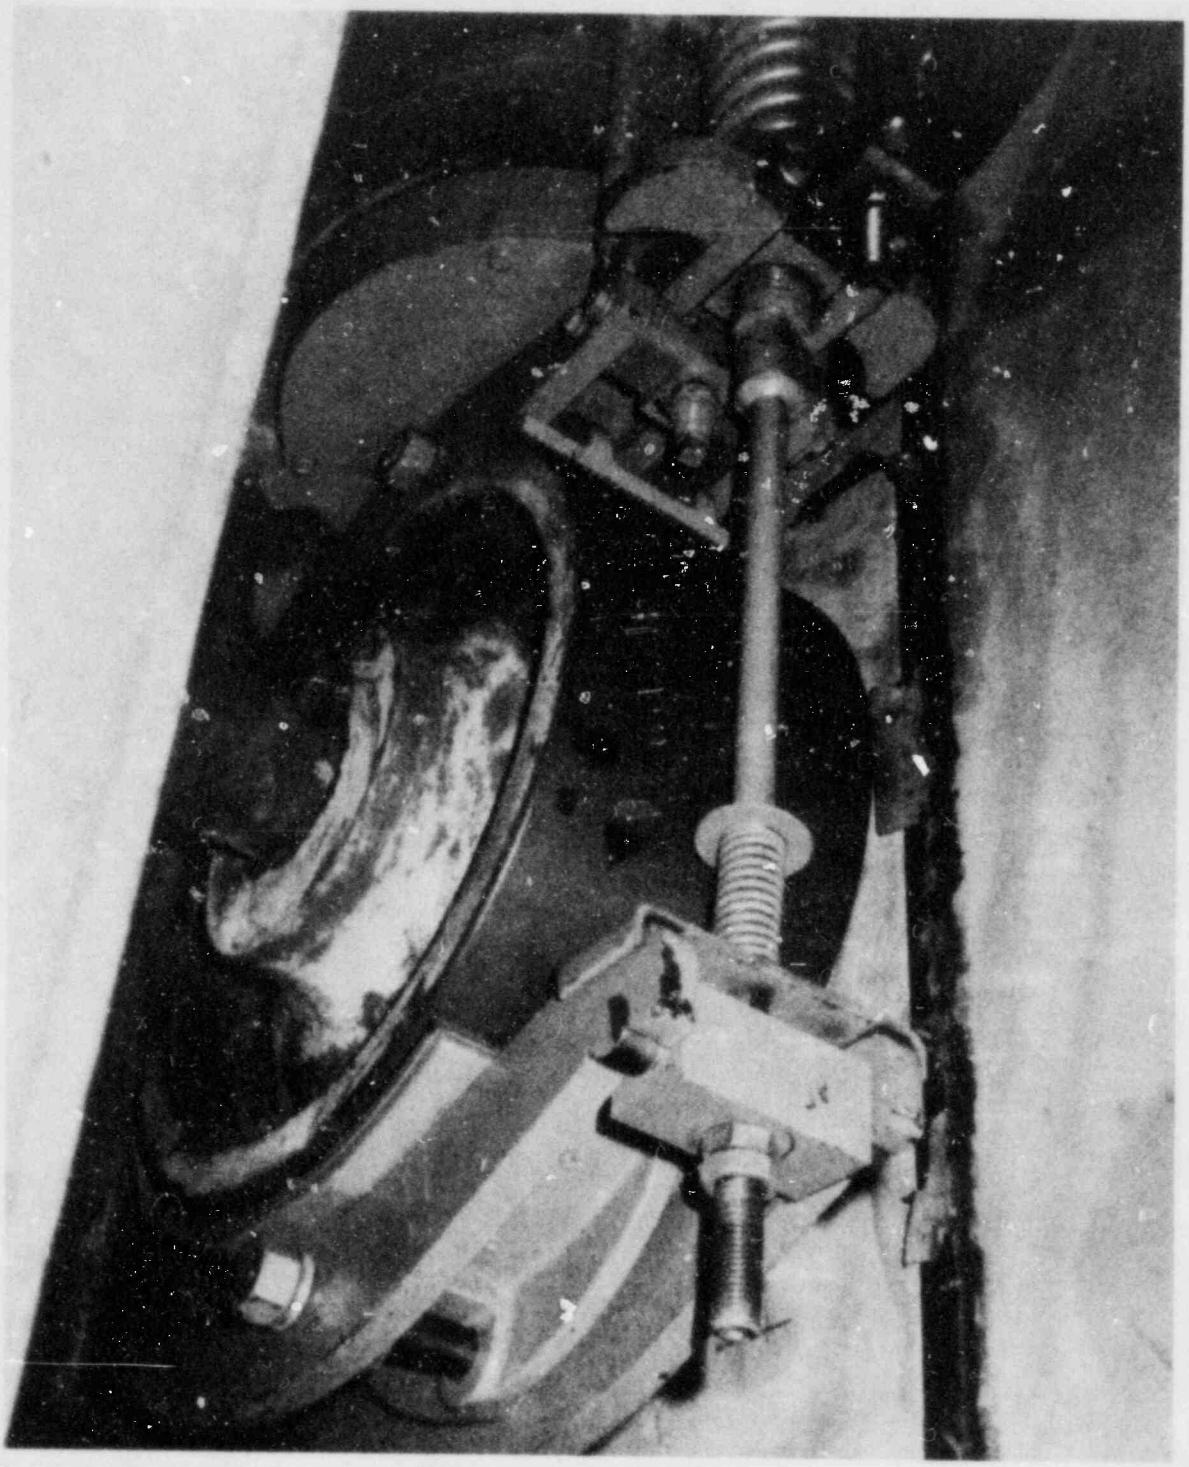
Refurbished main hoist magnetic drum brake assembly.
